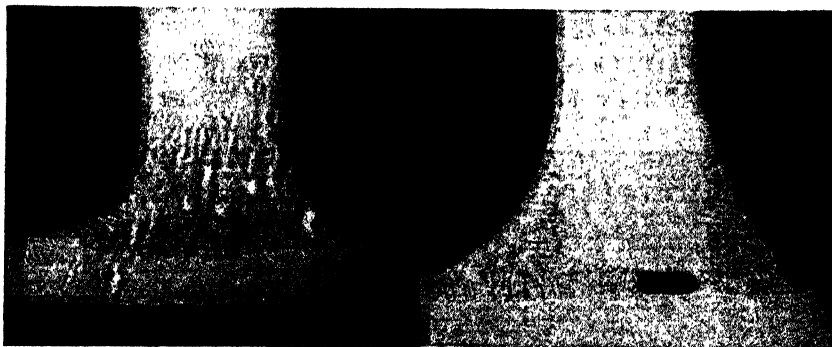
Hard-soldered joint after 12 months exposure to corrosive conditions.
